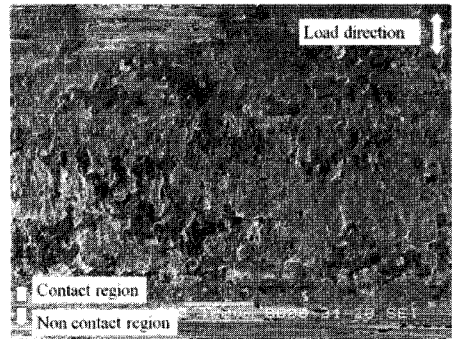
Fretting damage on the contact surface ( $\lambda = 1.0, N = 2 \times 10^7$  cycles)
